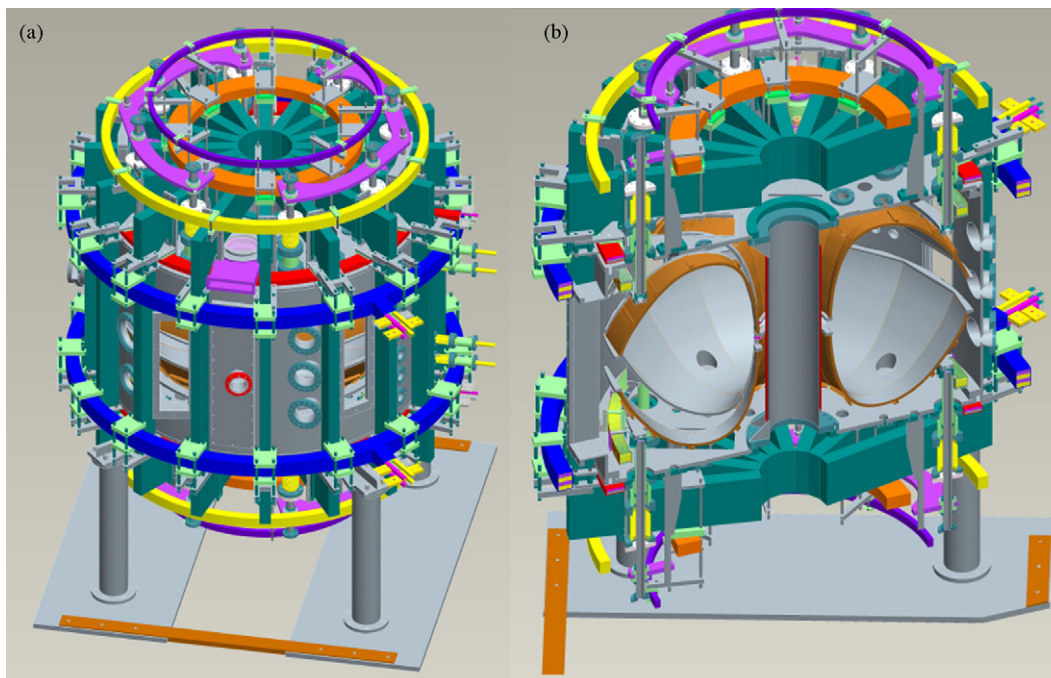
Elevation (a) and section (b) of LTX, showing the internal heated shell.
